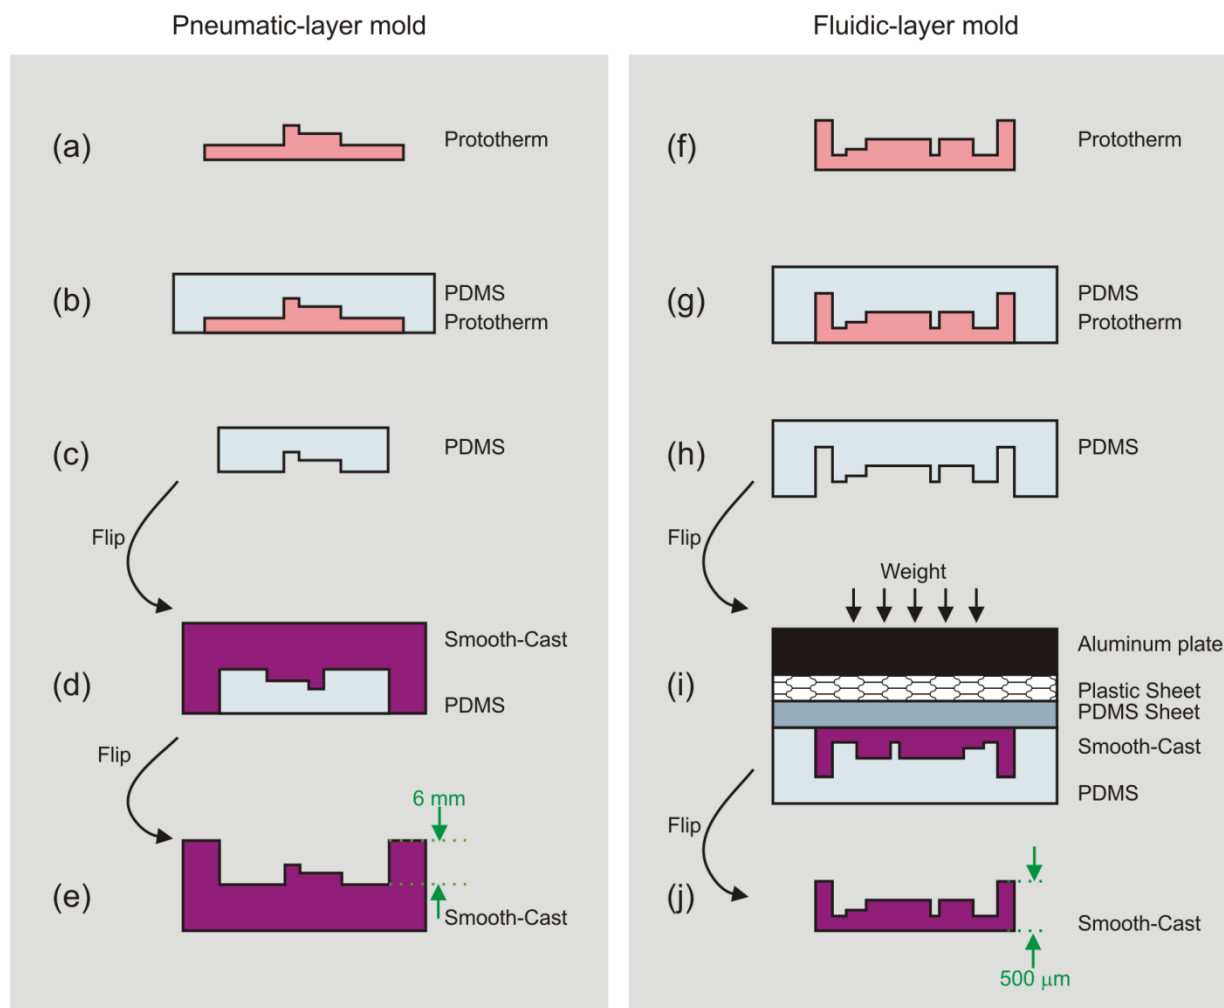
Fabrication process for making Smooth-Cast molds from Prototherm molds. (a)-(e) show the process for making the pneumatic-layer mold, while (f)-(j) show the process for making the fluidic-layer mold. (a) and (f) show the initial Prototherm mold. In (b) and (g), a thick (> 6 mm) layer of PDMS is patterned onto the Prototherm mold. In (c) and (h), the PDMS is removed from the Prototherm, and in the case of (c), the PDMS piece is cut out to have a slightly larger footprint than that of the finished device. In (d) the Smooth-Cast plastic is molded using the PDMS as a master. The same is true of (i), however, because the fluidic PDMS layer is fabricated using clamping (see Figure 4.3(e)), the Smooth-Cast master must be an exact copy of the original Prototherm master, with a flat base and no extraneously tall structures that prevent clamping in Figure 4.3(e). Finally, (e) and (j) depict the resulting Smooth-Cast plastic masters.
